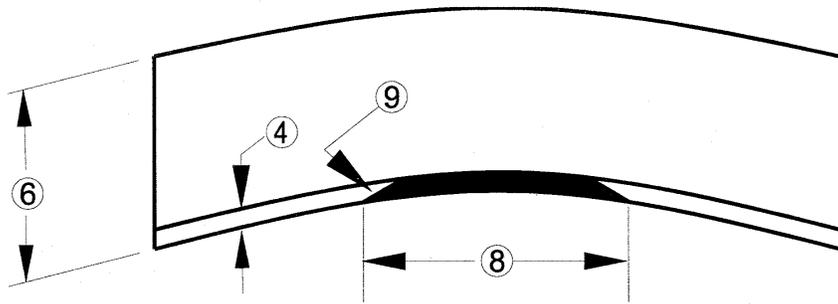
Tack Weld Taper (~3:1).
